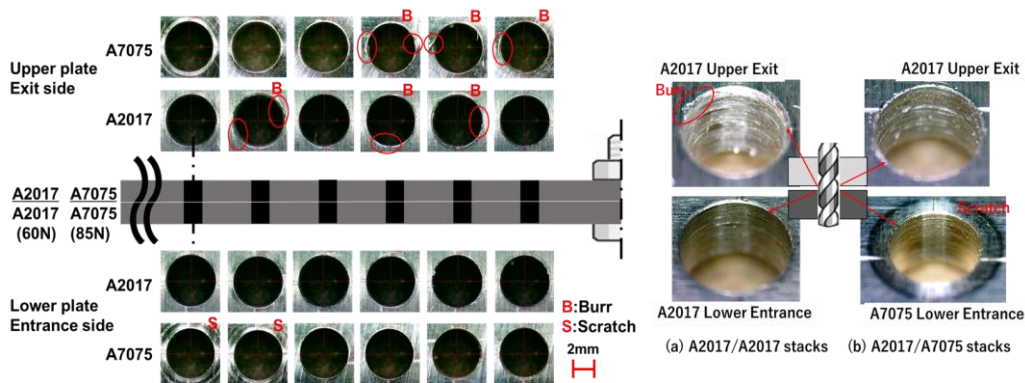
Appearance of workpiece after drilling in stacked plates from the same material.
